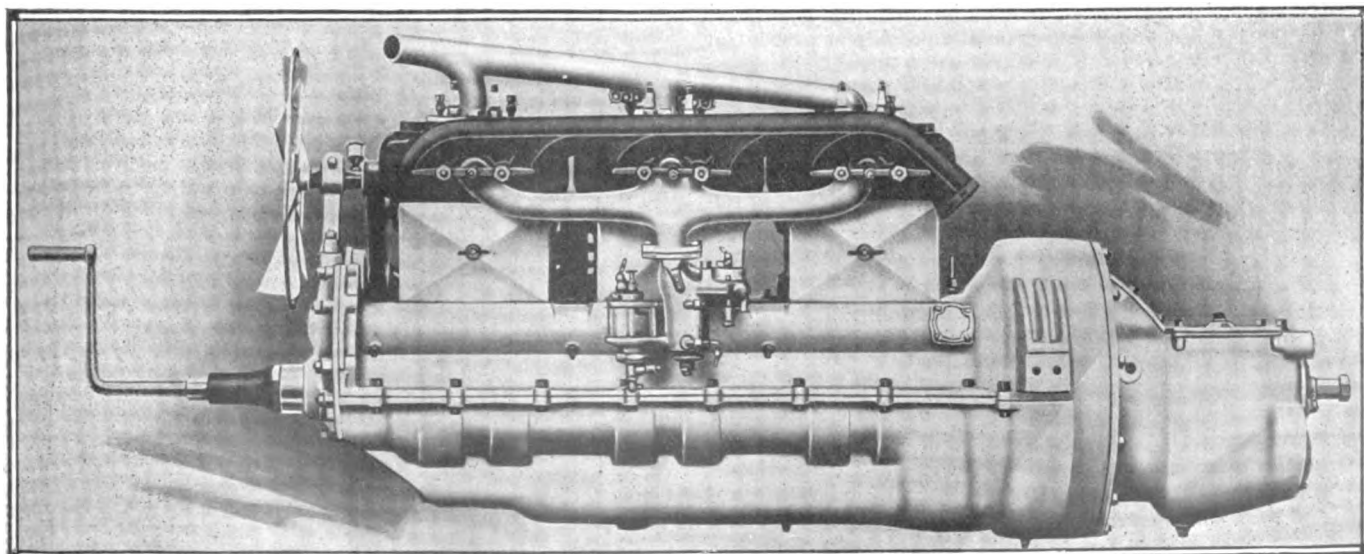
Side elevation of unit power plant of the Havers 6-44, intake side. Note cover plates inclosing valves
